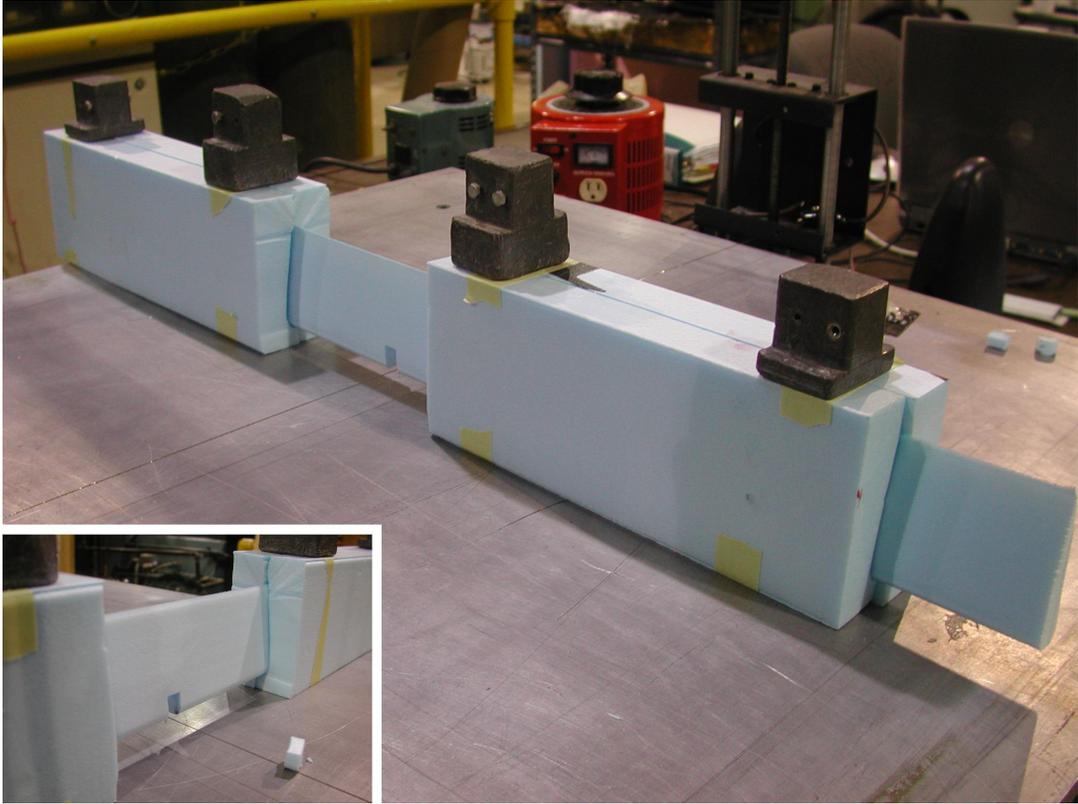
Elevator – hinge support cutout, detail view bottom left.
